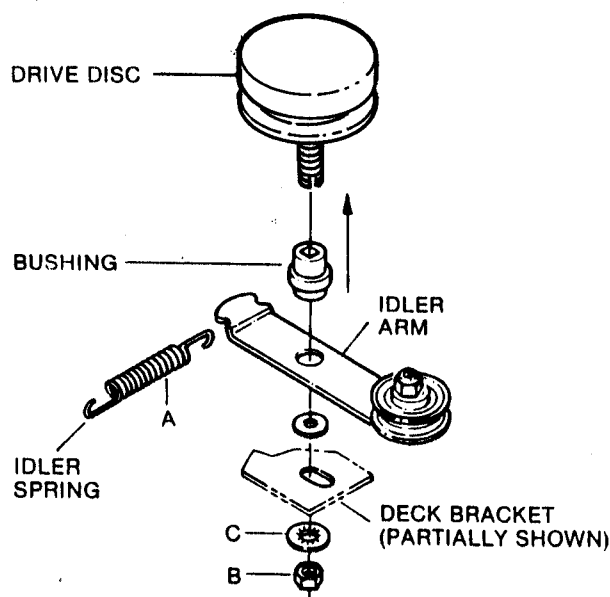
A-IDLER & ENGINE BELT DETAIL
